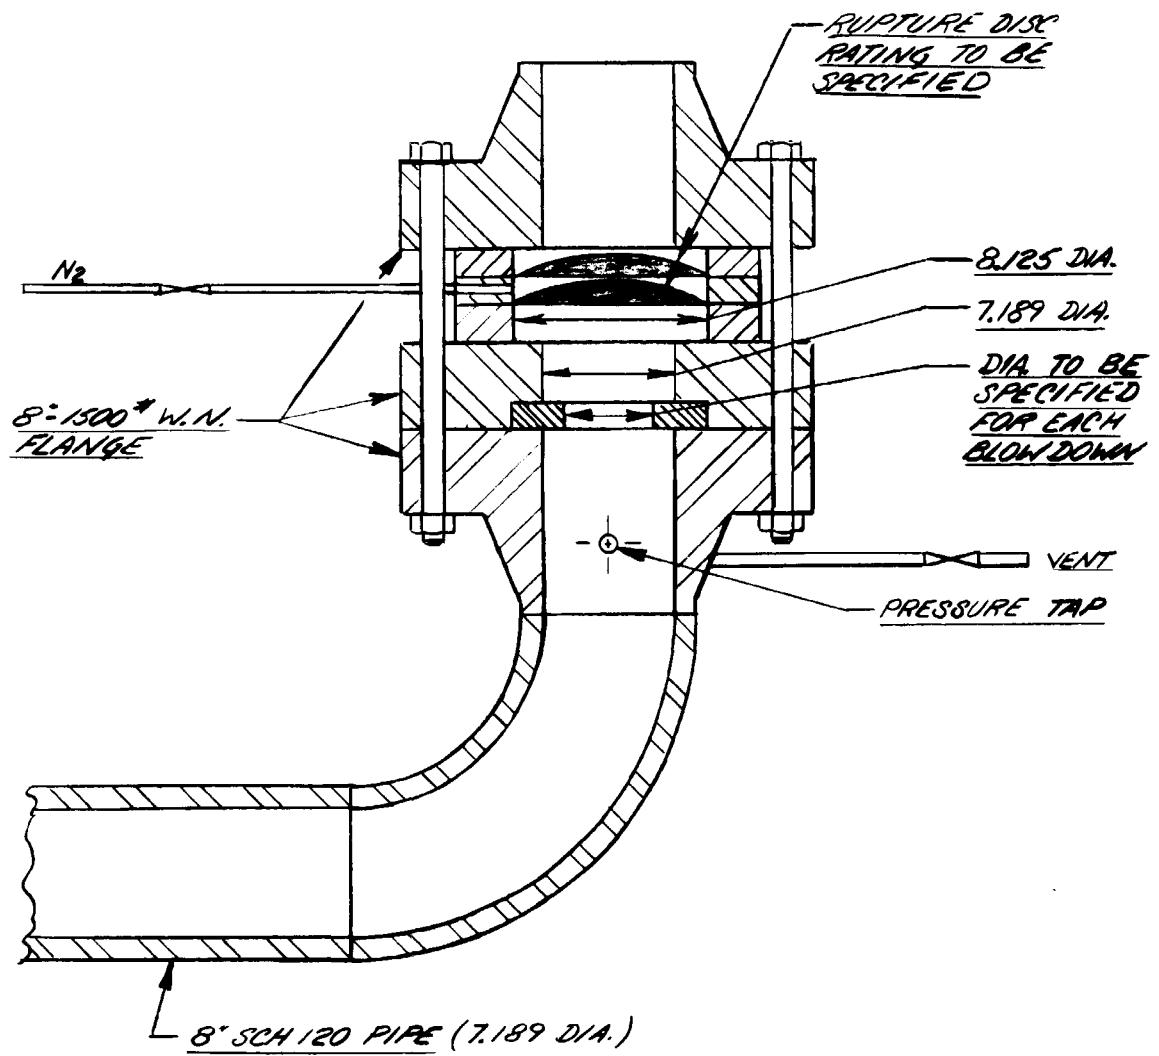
RUPTURE DISC ASSEMBLY
